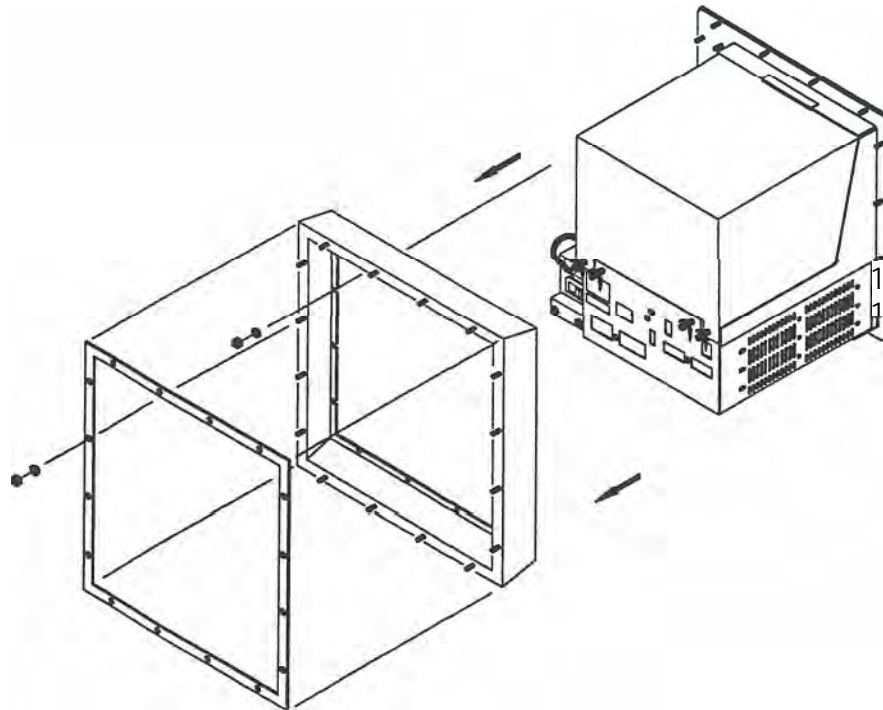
PanelMate Series 2000 (Model 2600) Mounting Collar Assembly
